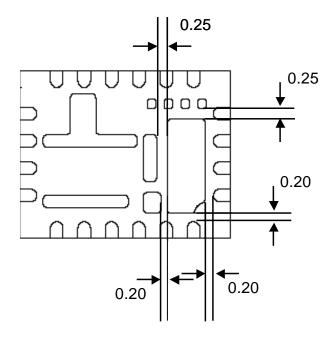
Exposed metal and mechanical dimensions of the package. The gray area represents the bottom metal noconnect area. This area should be clear of any traces, planes, or vias, on the top layer of the PCB.
